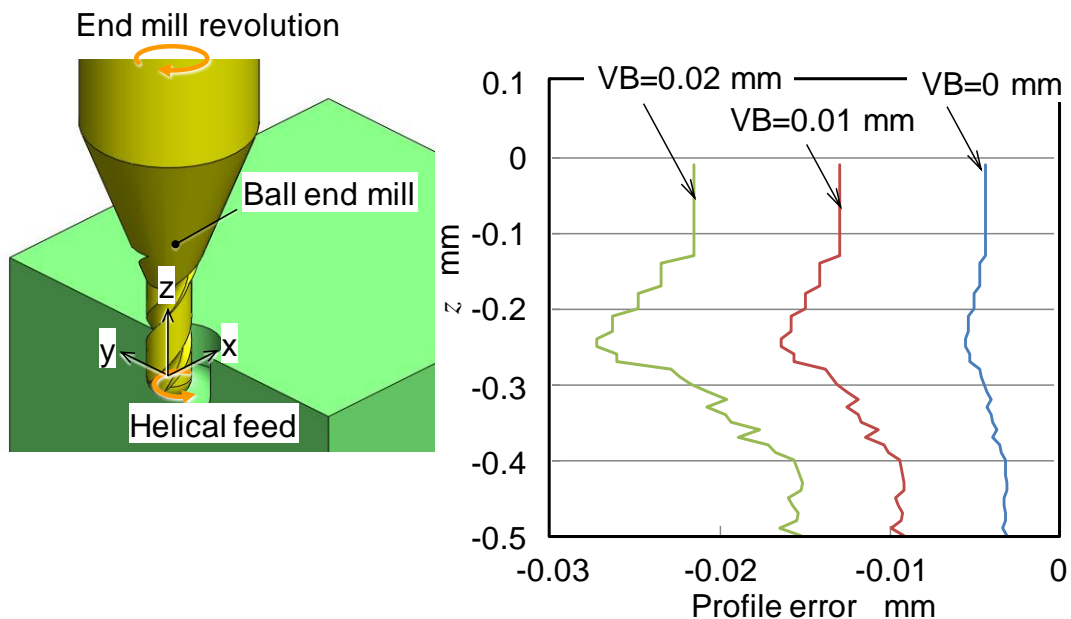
19 Profile error of the surface machined with a ball end mill in CCW feed direction (Down milling).
